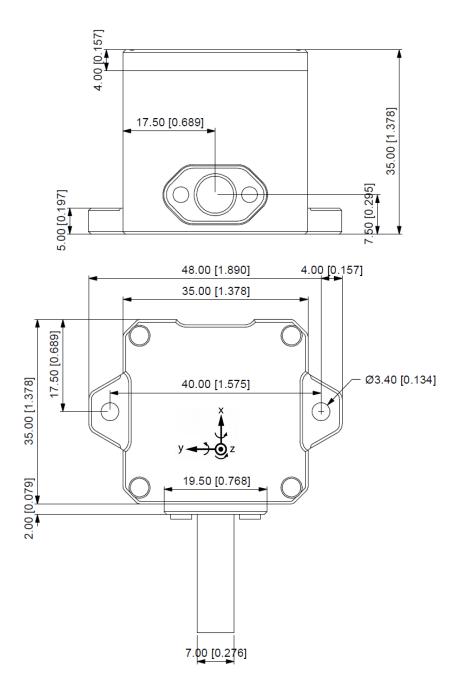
TransducerM TM362 / TM362-P Mechanical Drawing
